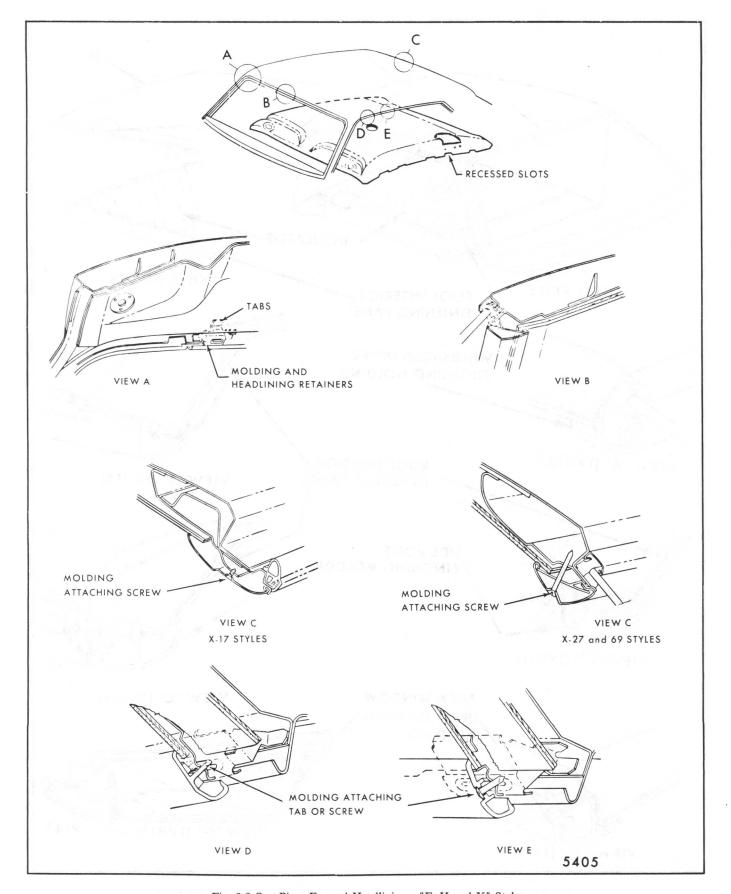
One Piece Formed Headlining - "F, H and X" Styles
